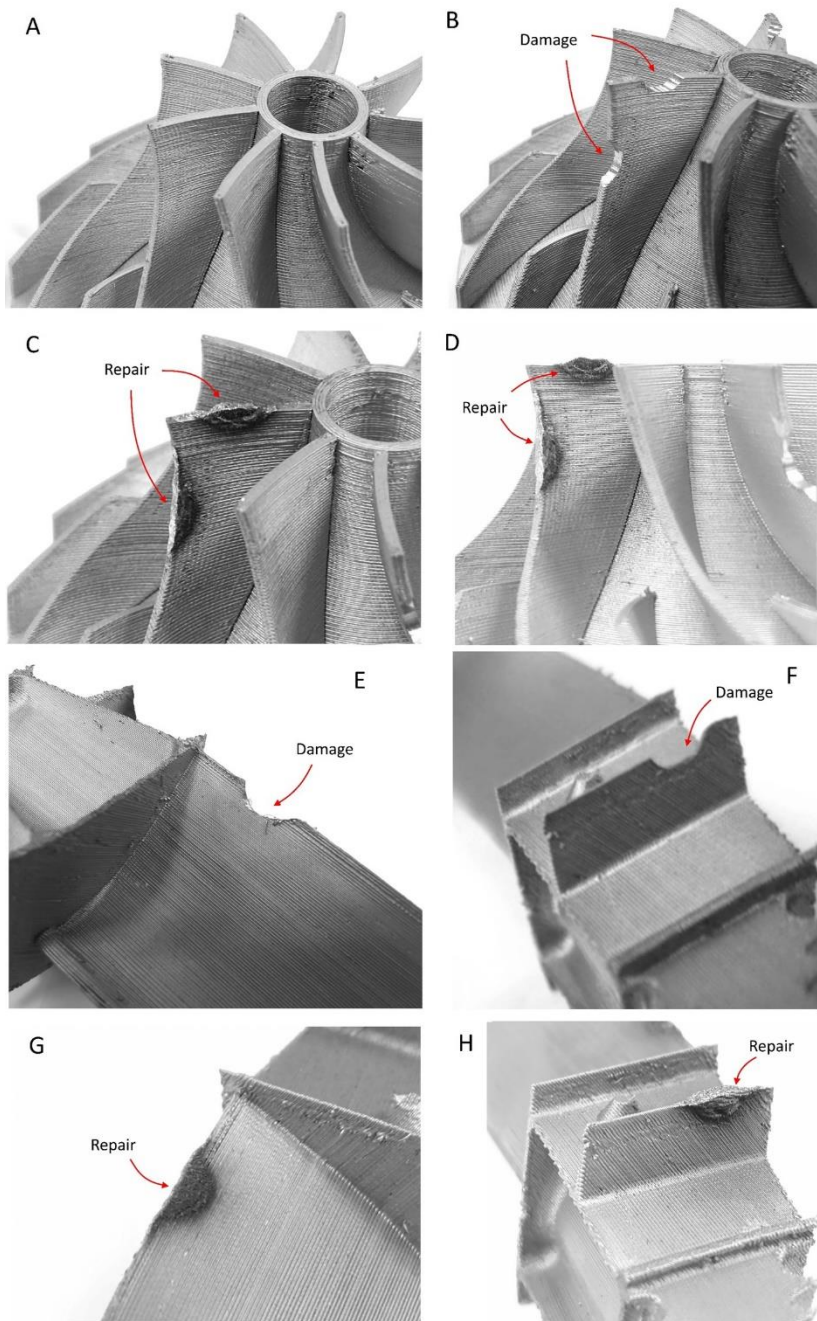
Demonstrations of a) pump impeller in original condition; b) damage introduced to blades; c, d) repaired impeller blades; e, f) damage introduced to turbine blade; g, h) repaired turbine blade
